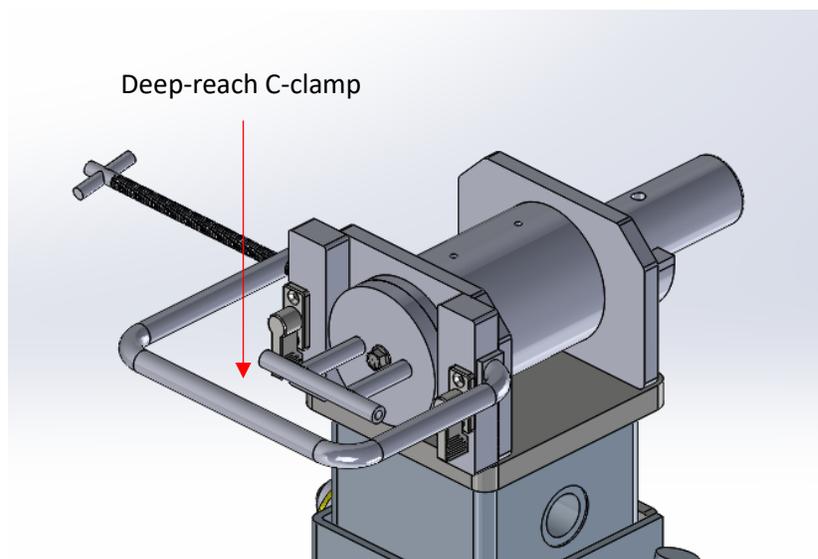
Final Idle End Design Integrated with a Preventive Deep-reach C-
